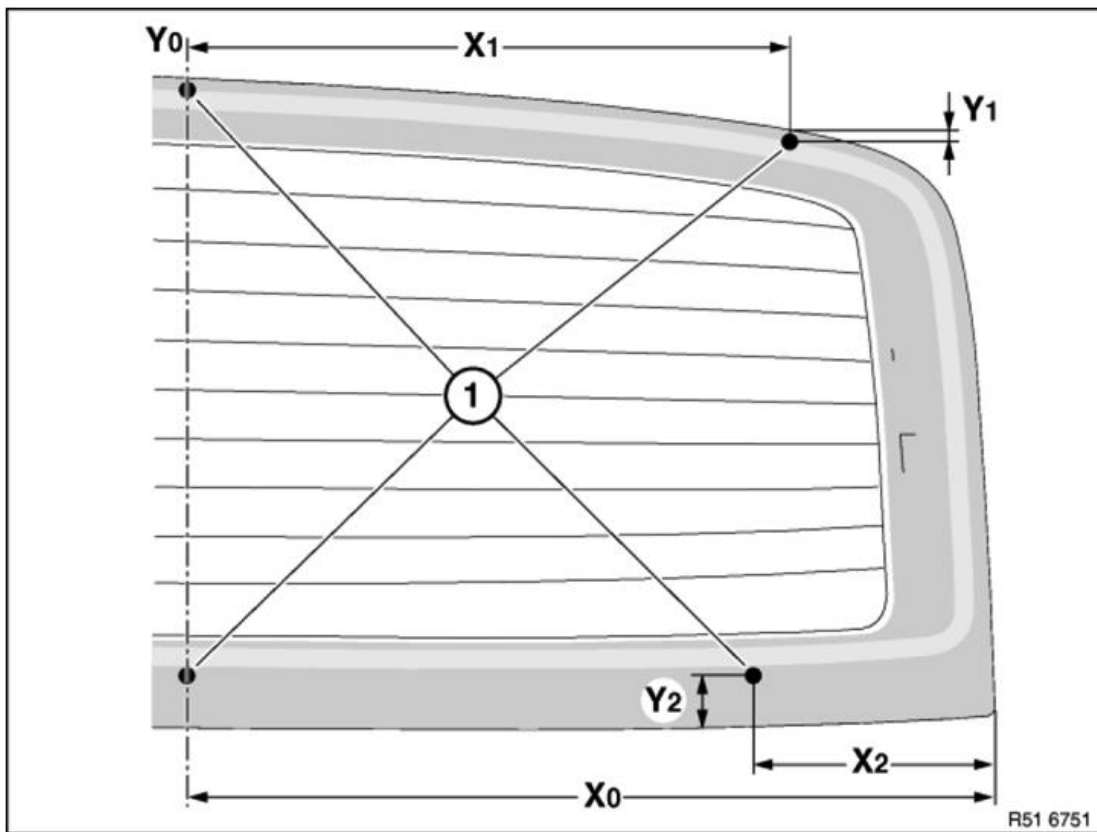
Identifying Upper And Lower Spacer Buffer Dimension
